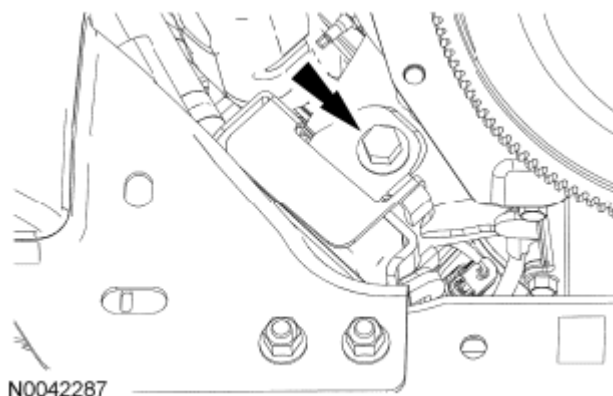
Locating LH Engine Support Insulator Through Bolt
